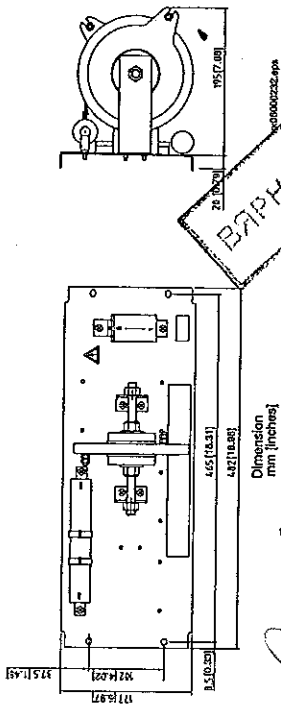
Dimension drawing of a one phase high impedance resistor unit
